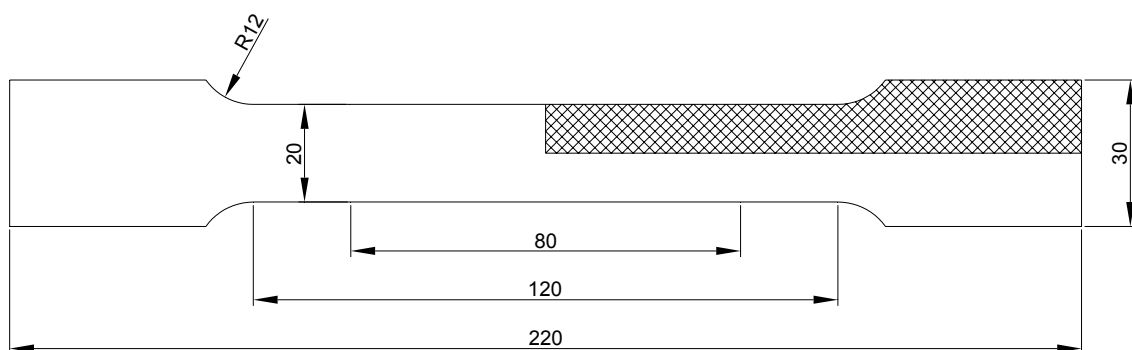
Sheet tensile test specimen dimensions (in mm).
